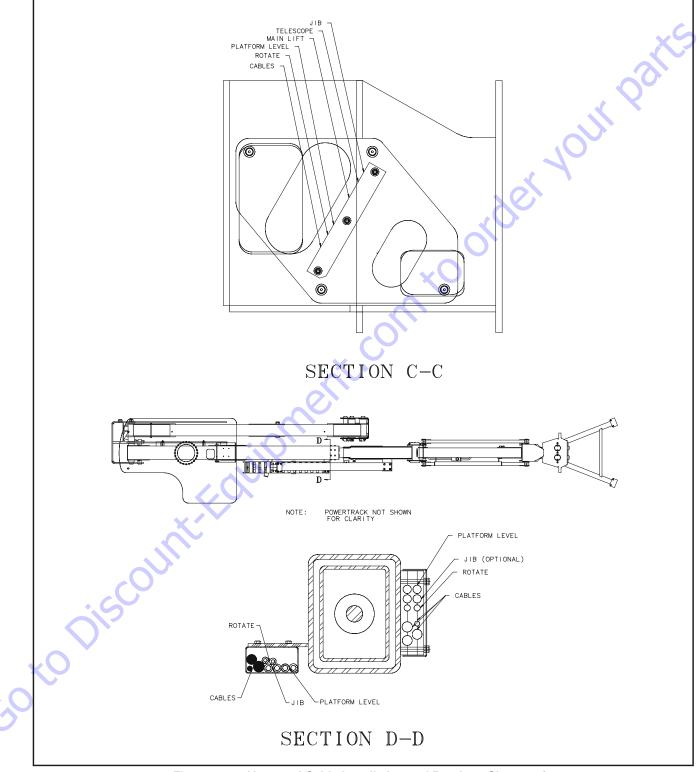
Hose and Cable Installation and Routing - Sheet 4 of 5
